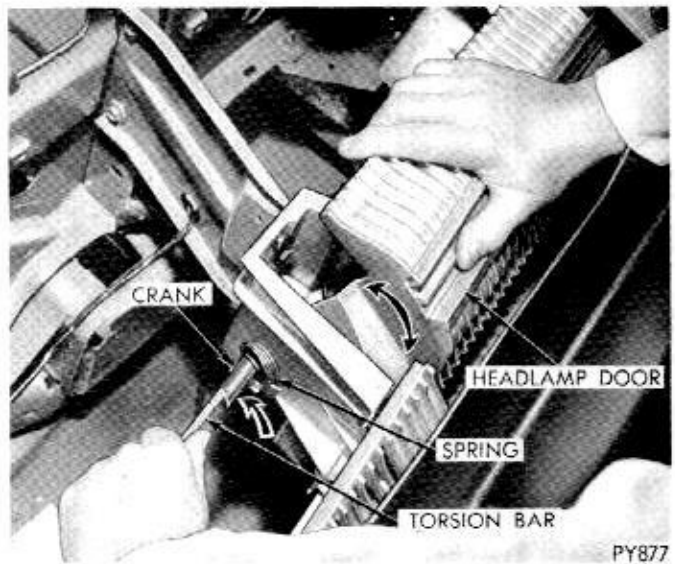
Removing Torsion Bar from Headlamp Door Crank
